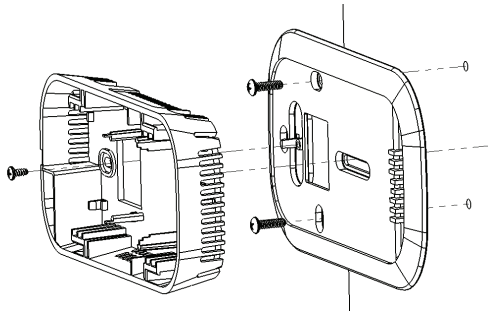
e Mounting instructions for DPW versions with DPTR000001
